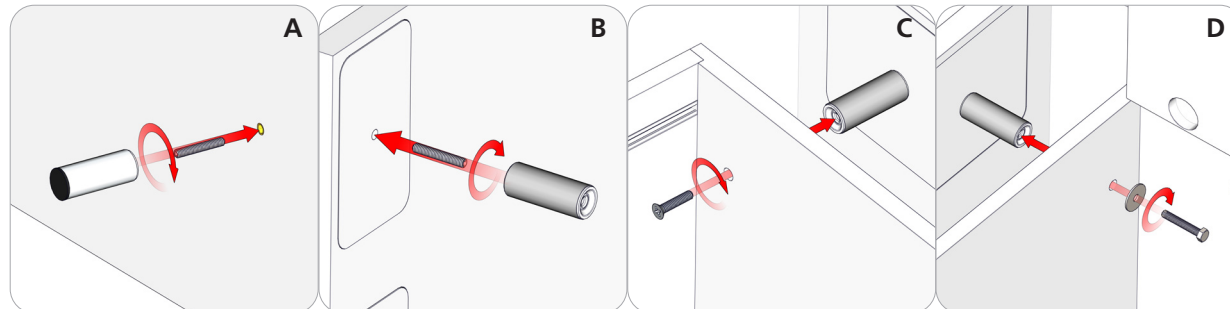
Image A. Use the hex key tool to drive the 2" set screw into the panel. Then, hand tighten the 30mm tube assembly 1 onto the set screw.
